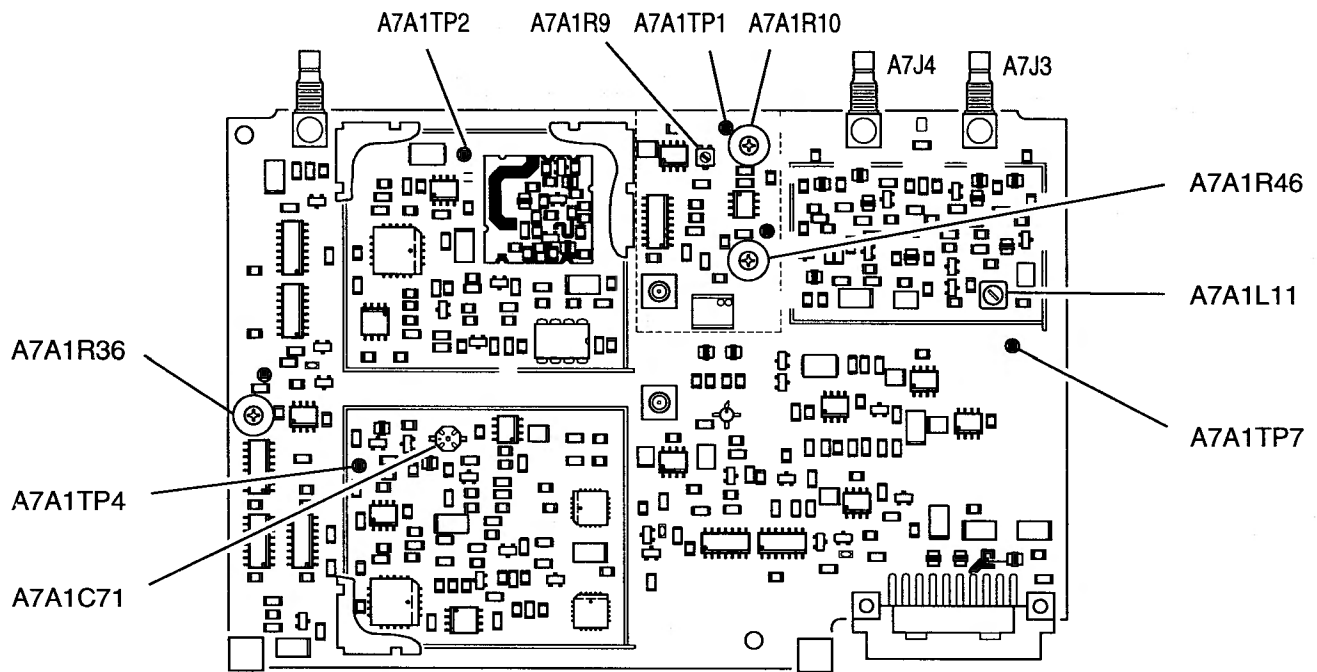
3rd LO PC Board Assembly (78A1A7A1) Removal
